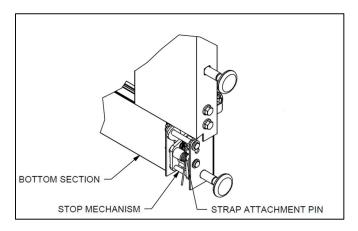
ATTACHING SAFETY BRAKE SAFETY SYSTEM TO BOTTOM SECTION with the STOP BRACKET ASSEMBLY
